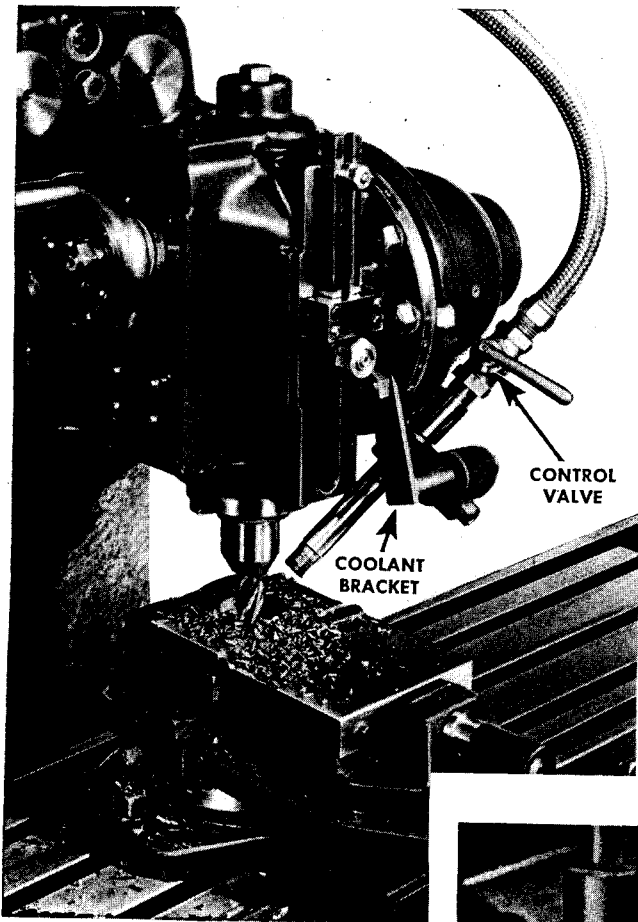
Above — Universal head with coolant bracket and distributor pipe in position.
